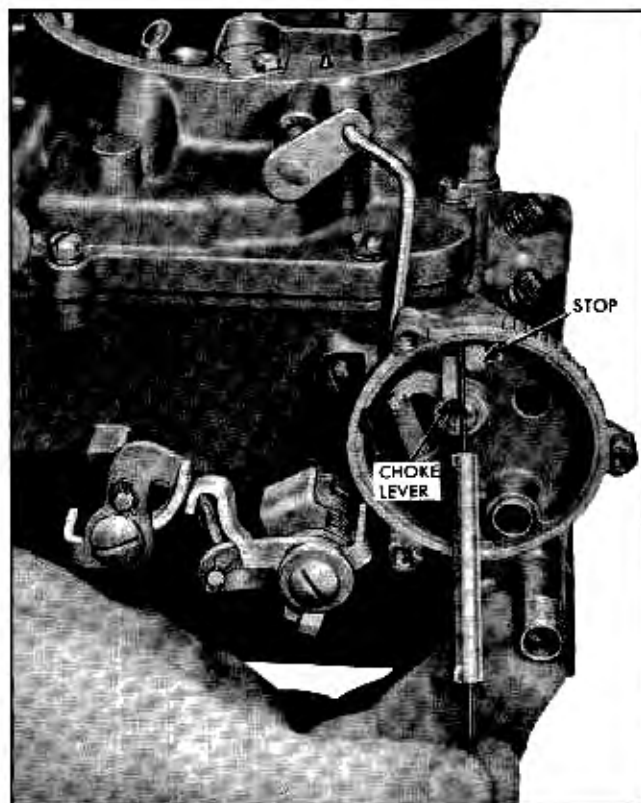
B-95 Checking Choke Piston Lever Adjustment
